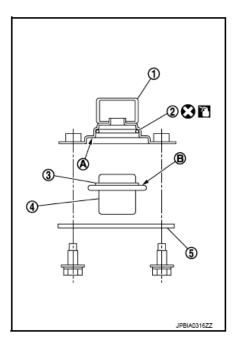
Identifying Fuel Damper, Cup, Clip, Fuel Tube And O-Rings Courtesy of NISSAN NORTH AMERICA, INC.
